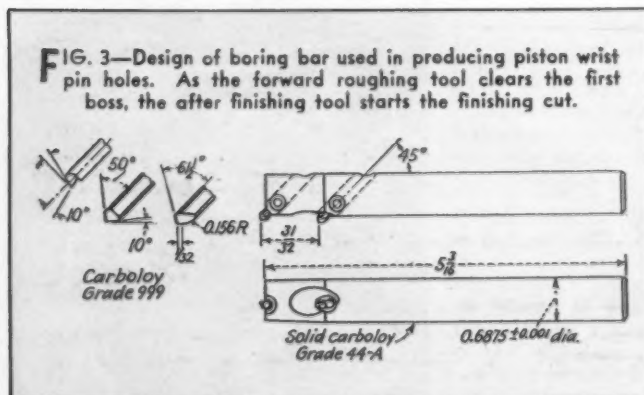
Design of boring bar used in producing piston wrist pin holes. As the forward roughing tool clears the first boss, the after finishing tool starts the finishing cut.
